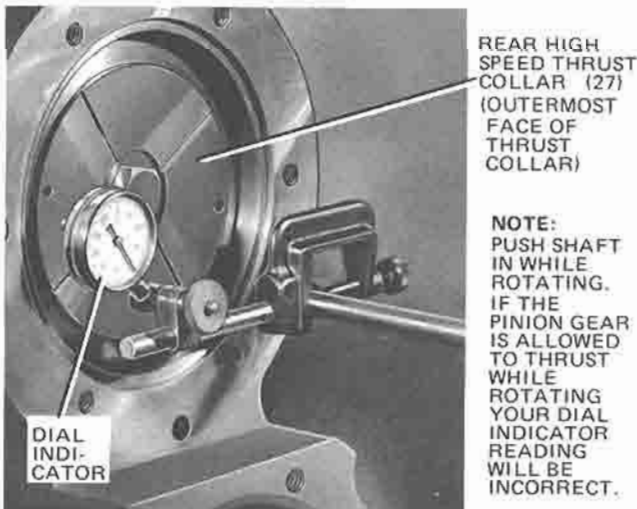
CHECKING REAR HIGH SPEED THRUST COLLAR FACE
